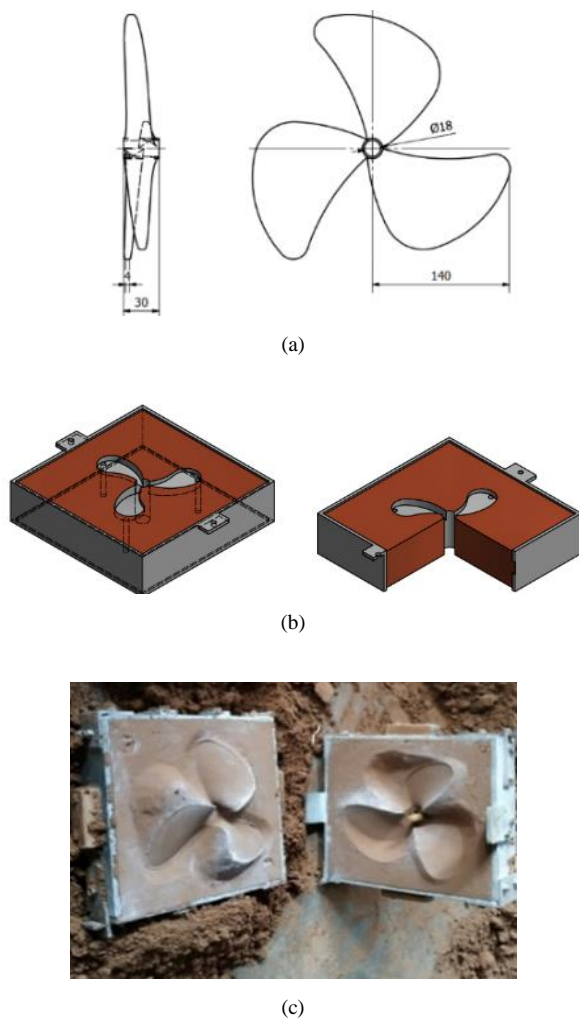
(a) Design propeller, (b) Sand mold design, (c) Ready-made sand mold
